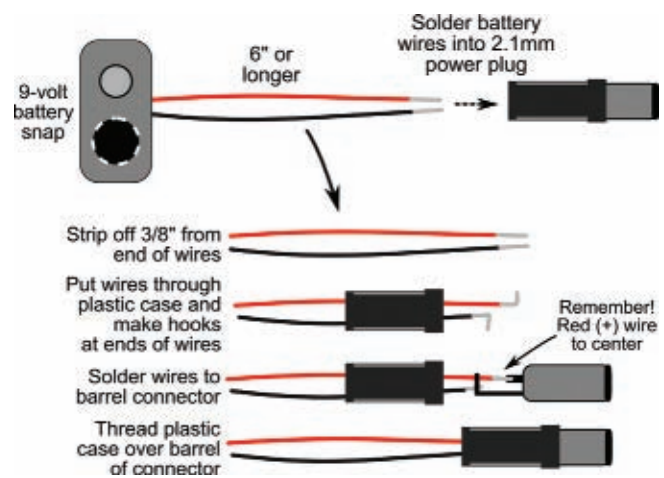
Solder a 2.1 mm barrel connector to the nine volt battery leads as shown. Be sure to double-check your work against shorts, and that the red lead is soldered to the center of the connector.
